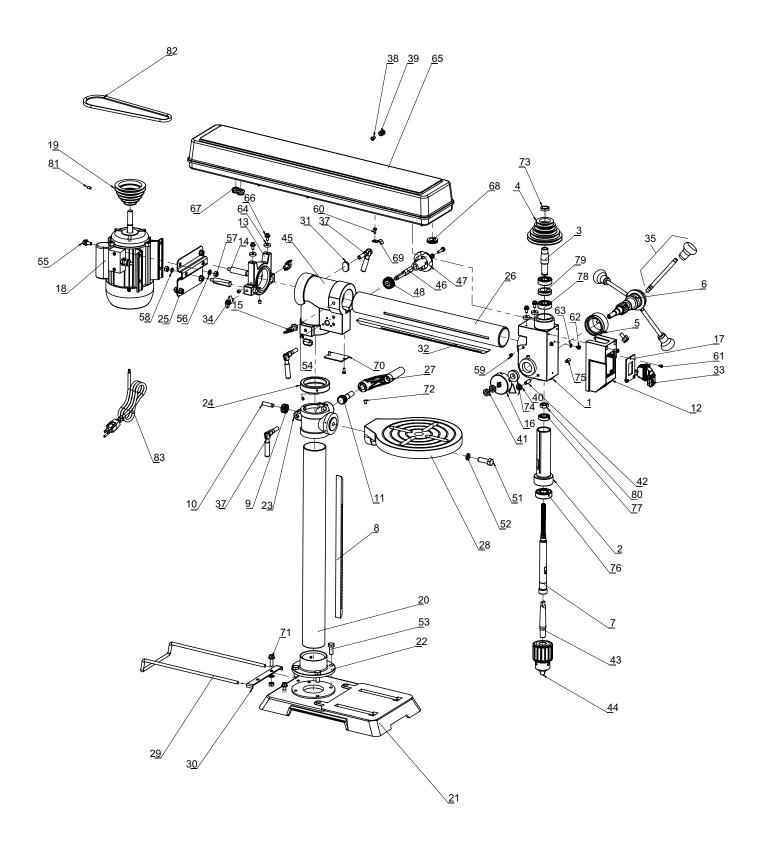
Repair Parts Illustration for Model 9680341C Bench Drill Press
